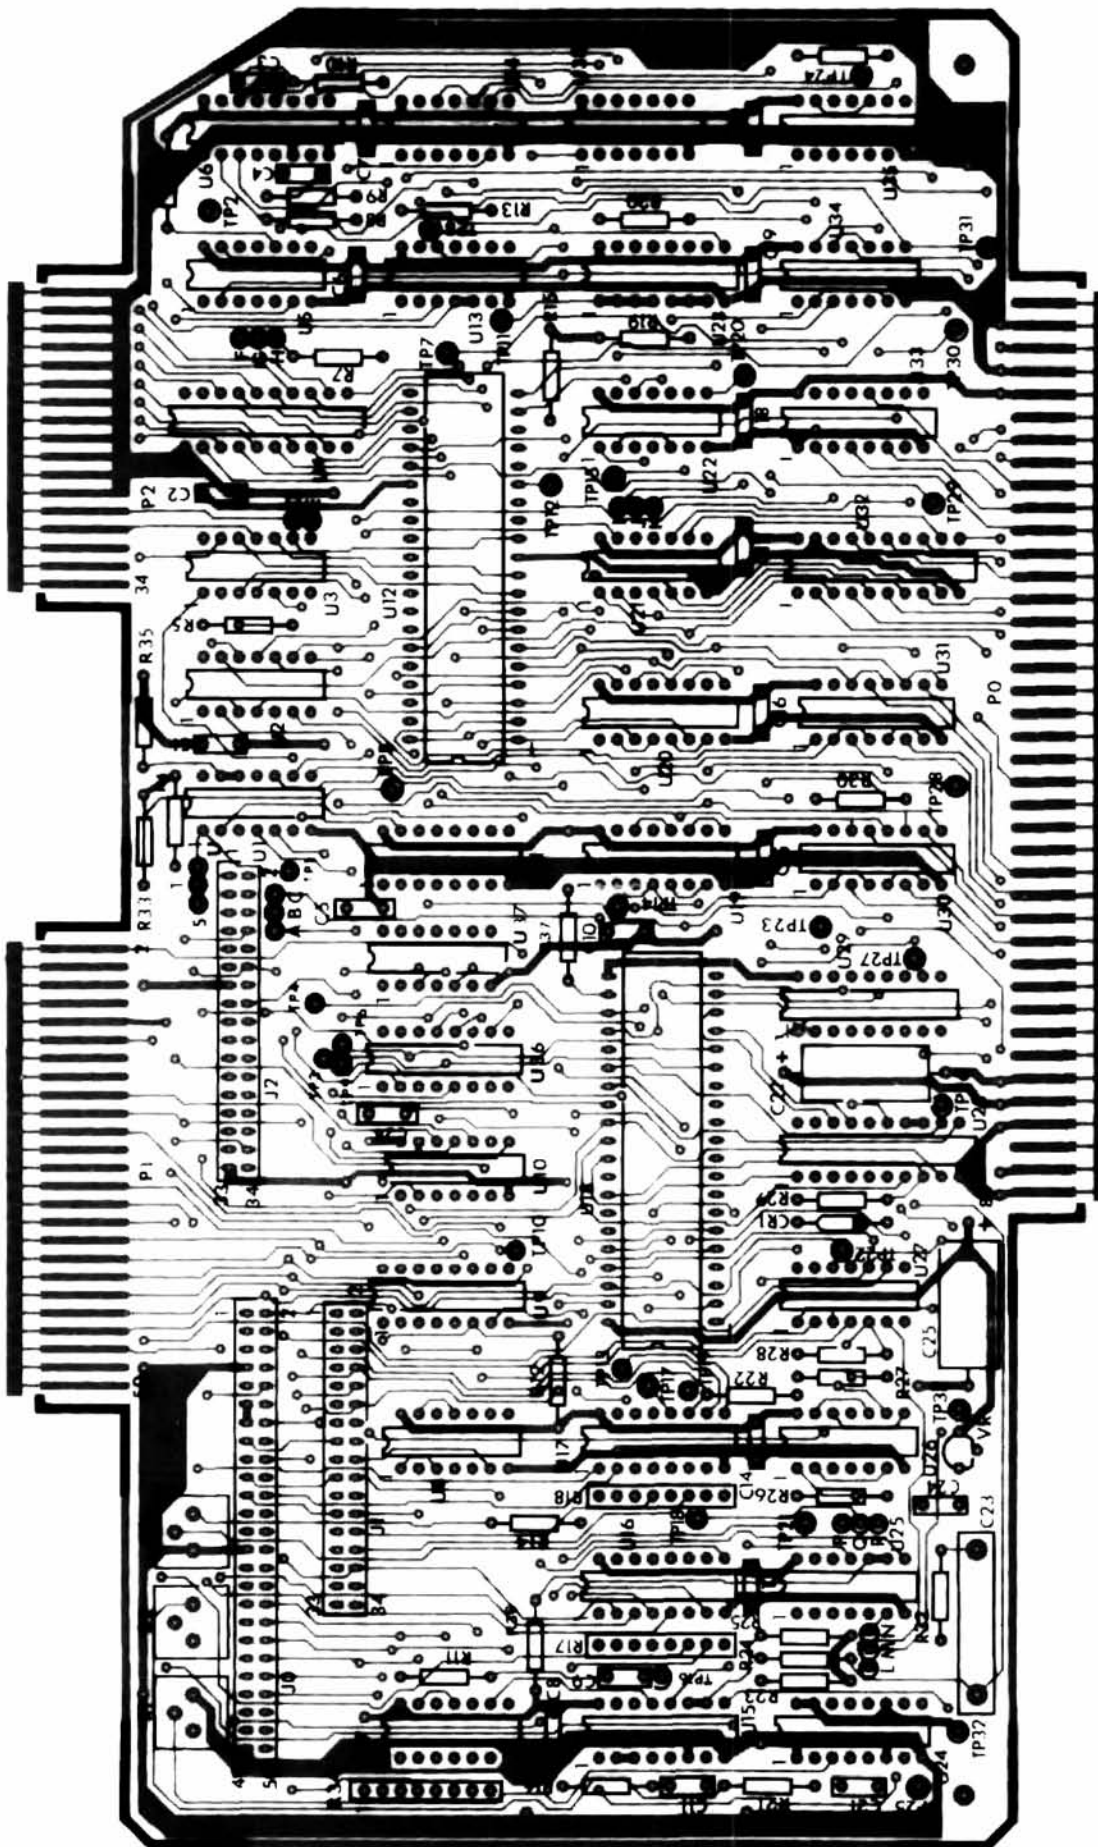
X-Ray View FDC Printed Circuit Board — Component Side
